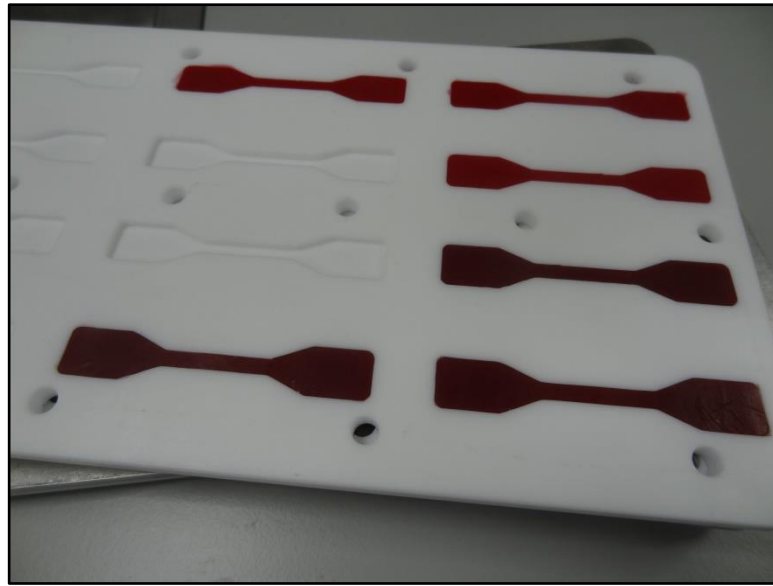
PTFE lined mould for fabrication of dumbbell shaped tensile test specimens.
